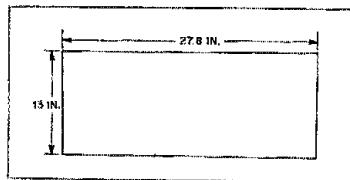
After allowing for the gain to be attained during the bending process, these are the dimensions of the piece of metal before bending.
